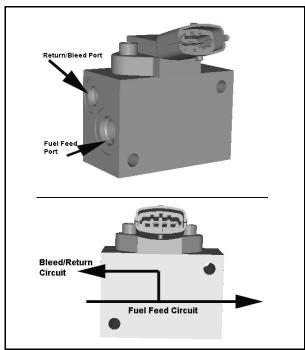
Gasoline Fuel Pressure and Temperature Manifold Assembly
